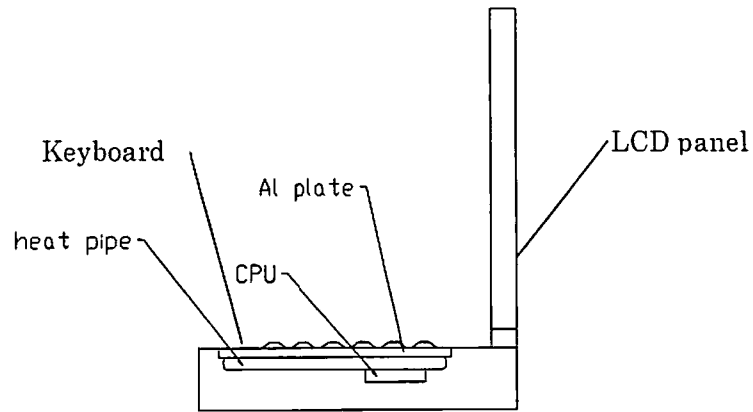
Heat spreader plate with a heat pipe under keyboard
